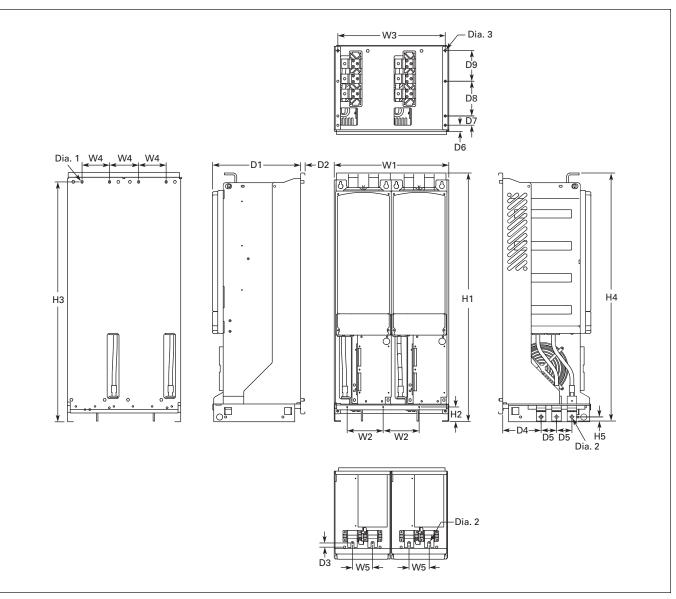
SPX9000 Dimensions, FR13 Open Chassis Converter
